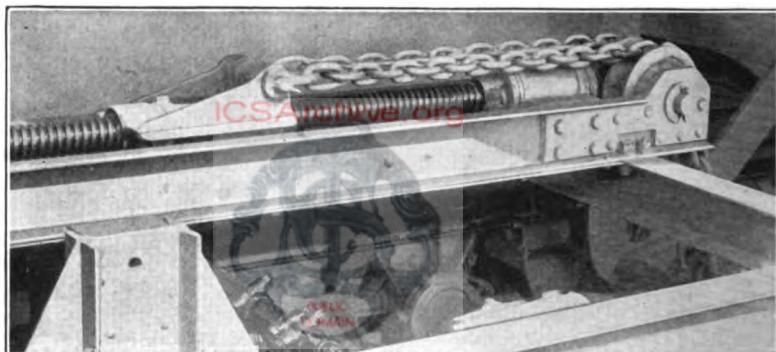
White 5-Ton Truck Power Dumping Mechanism
